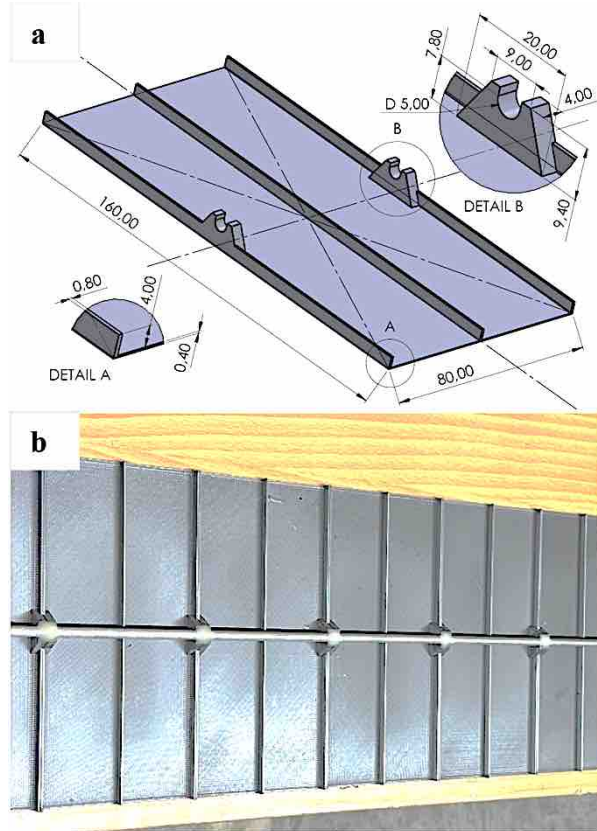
Scale model panels: a) technical drawing; b) assembly on aluminum torque tube.
